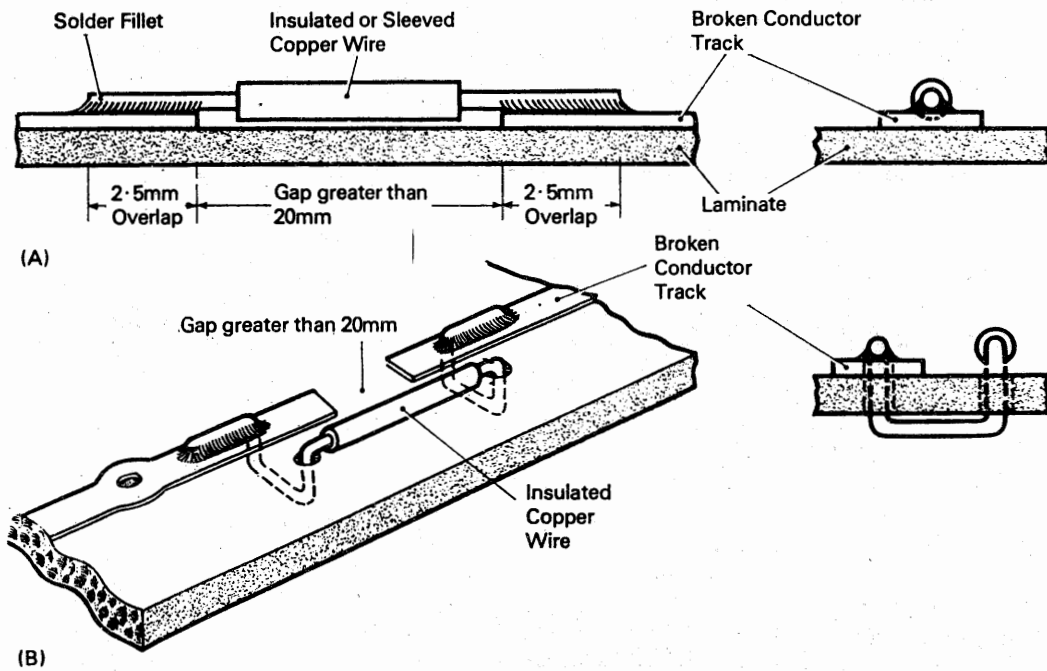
BROKEN TRACK REPAIRS (Gaps greater than 20 mm)
